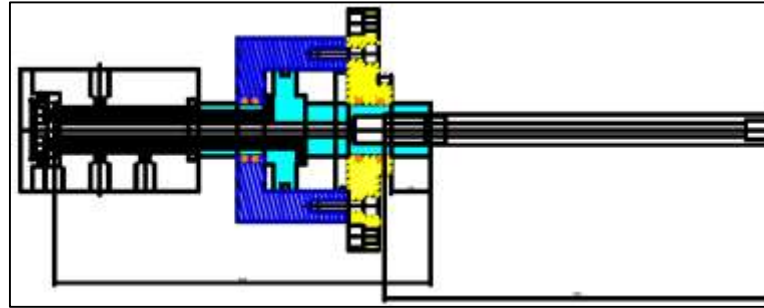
Assembly of Hydraulic Rotary Cylinder and Drawtube
